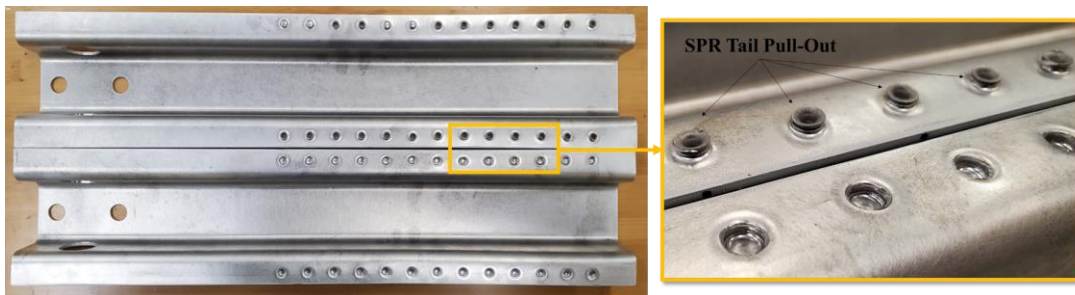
Consistent SPR rivet tail pull-out failure along the flanges
